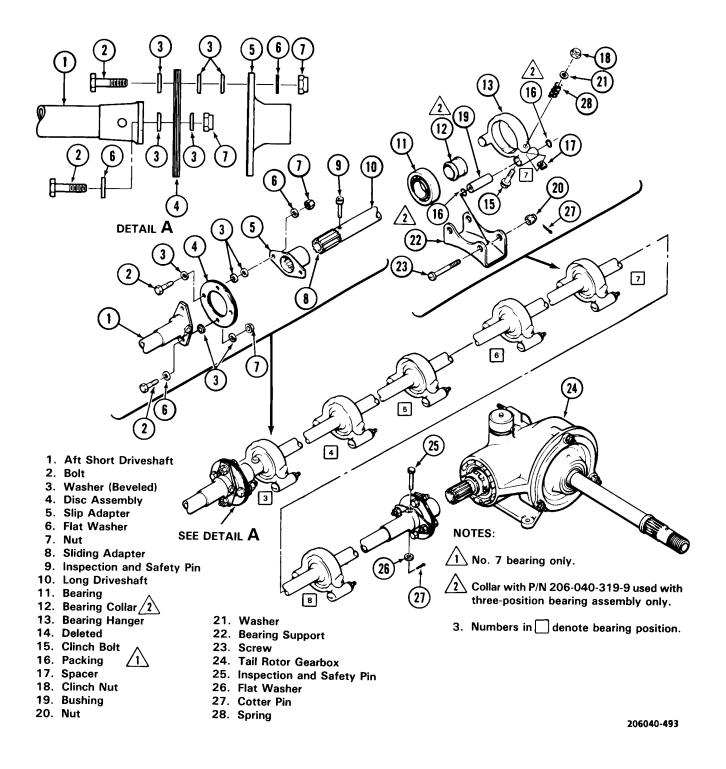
Long Driveshaft Installation — Tail Rotor (Spring Type)
